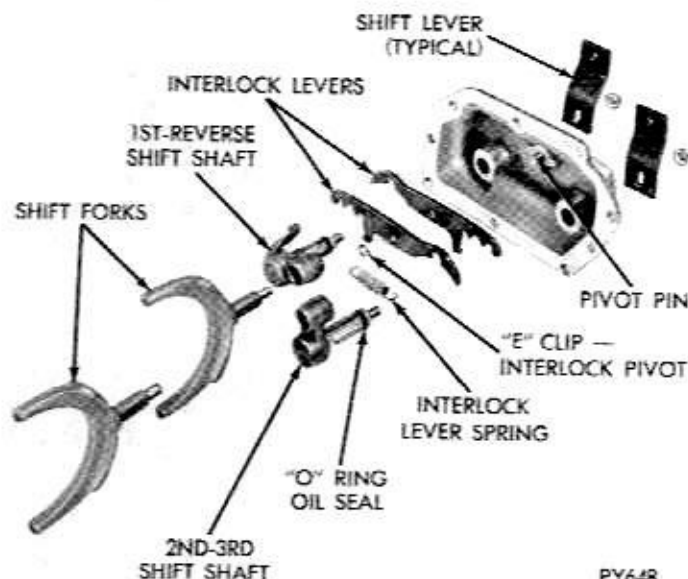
Gearshift Mechanism and Housing—Disassembled
